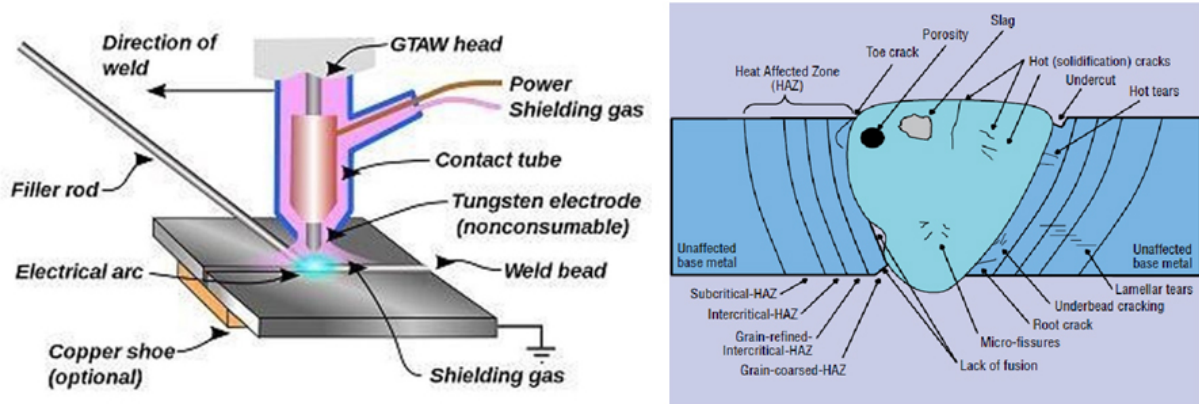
Schematics of (a) TIG welding process), (b) common welding defects and different zones in welded components.
